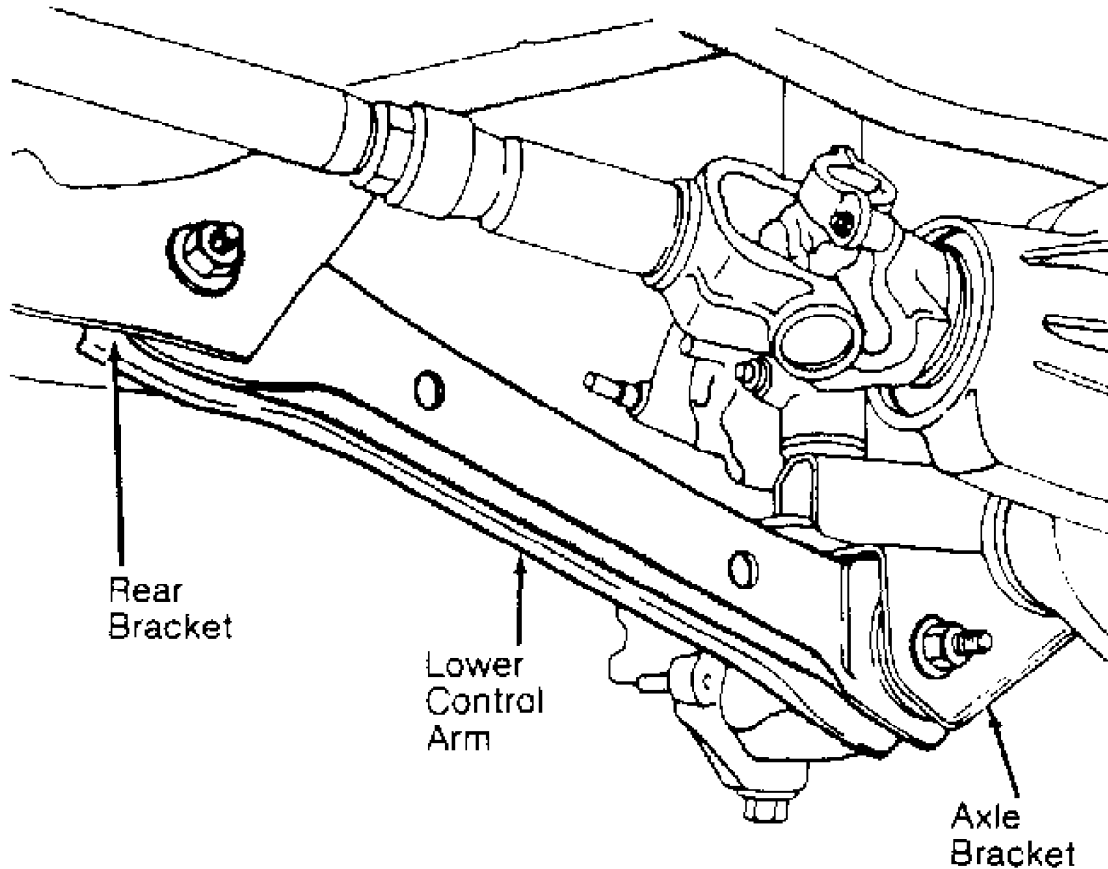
Identifying Lower Control Arm (Except Wrangler)
